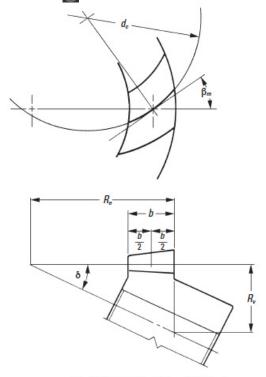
Spiral Bevel Gear (Left-Hand)
